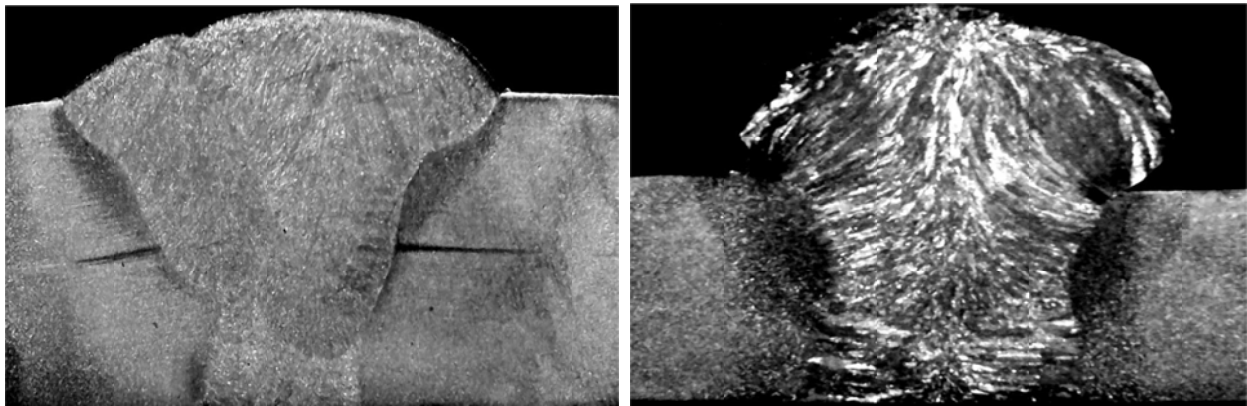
Macro-photographs of weld joints produced using a) 3.0 kJ/mm and b) 6.0 kJ/mm heat input with help of submerged arc welding.
